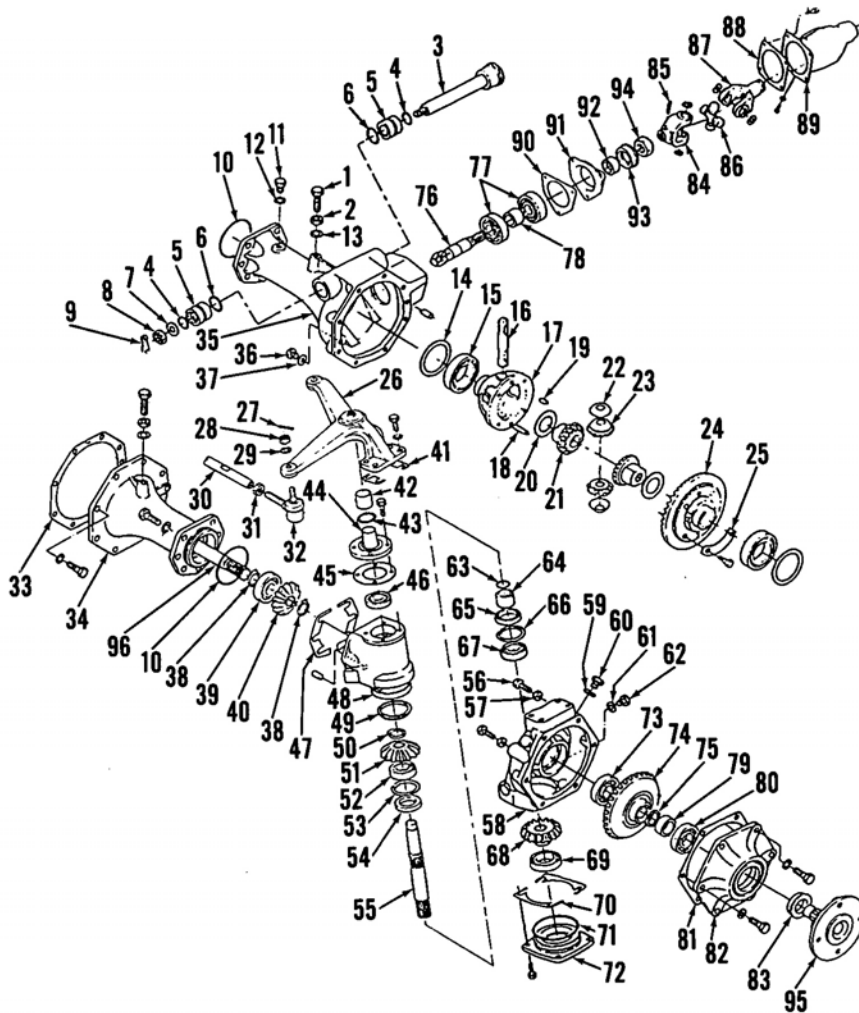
Exploded view of front-wheel drive axle used on Model B7100HST-D.
